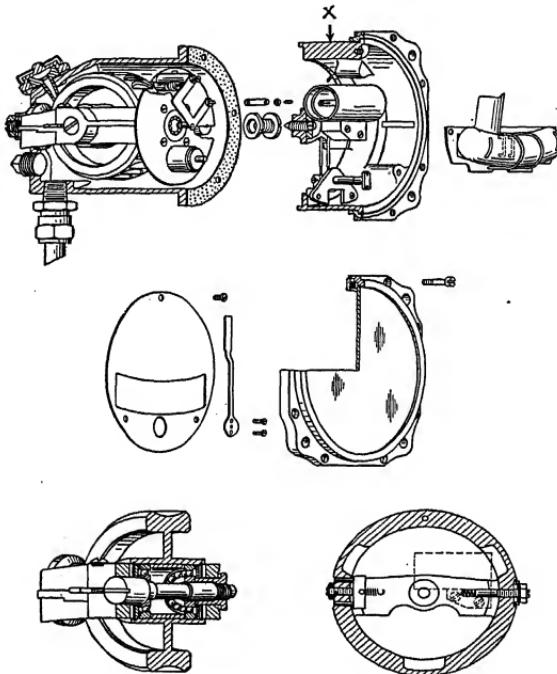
Construction details of Pioneer turn and bank indicator.
